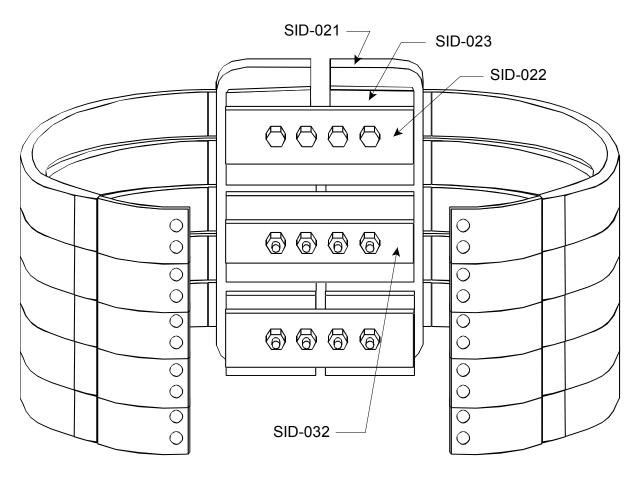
REMOVAL OF RIB CAGE SUPPORT ANGLE
